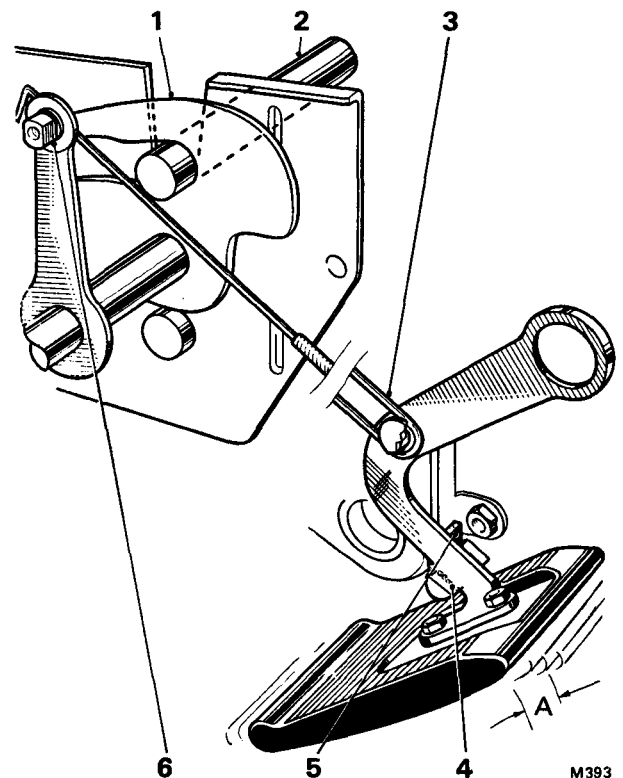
SETTING THE BONNET CATCH OPERATING MECHANISM
